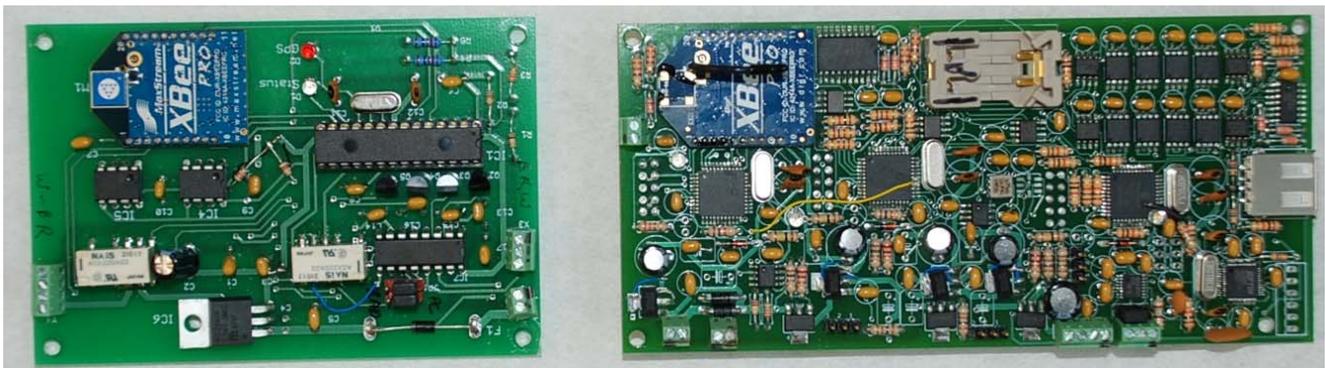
Comparison of the layout between old and upgraded Printed Circuit Board (PCB). The upgraded PCB contains power switching circuitry in a multi-tasking design.
